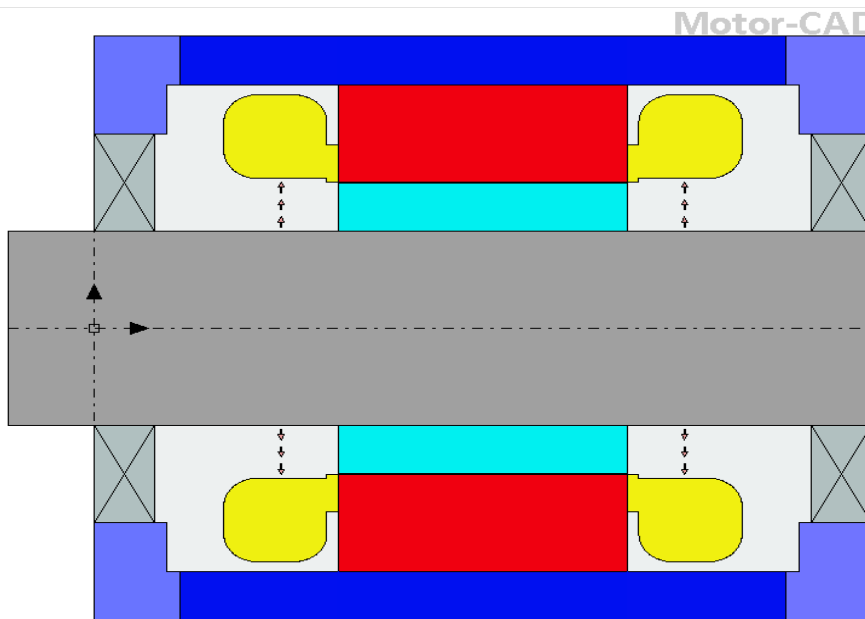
SRM Axial Sectional View by Motor_CAD.
